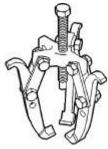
Puller 1026 Courtesy of CHRYSLER LLC
